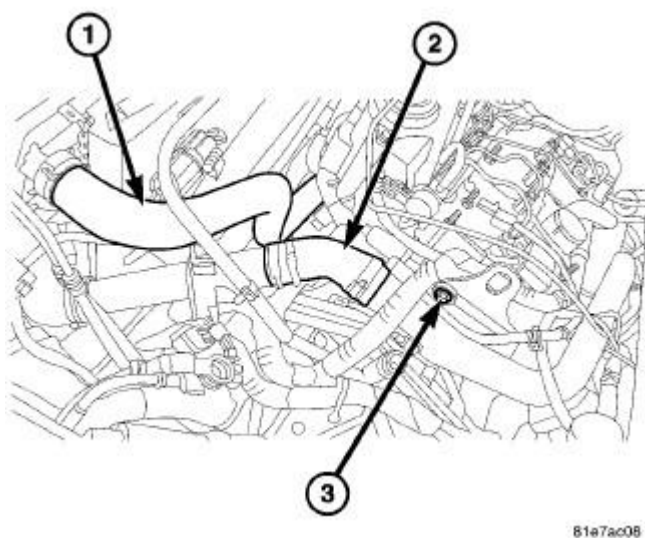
Upper Radiator Hose, Charge Air Cooler Hose & Fastener
